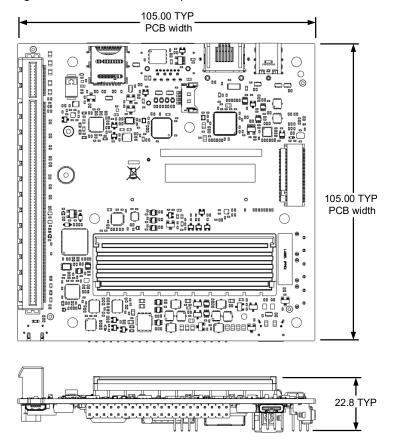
Developer Kit Carrier Board Mechanical Dimensions
